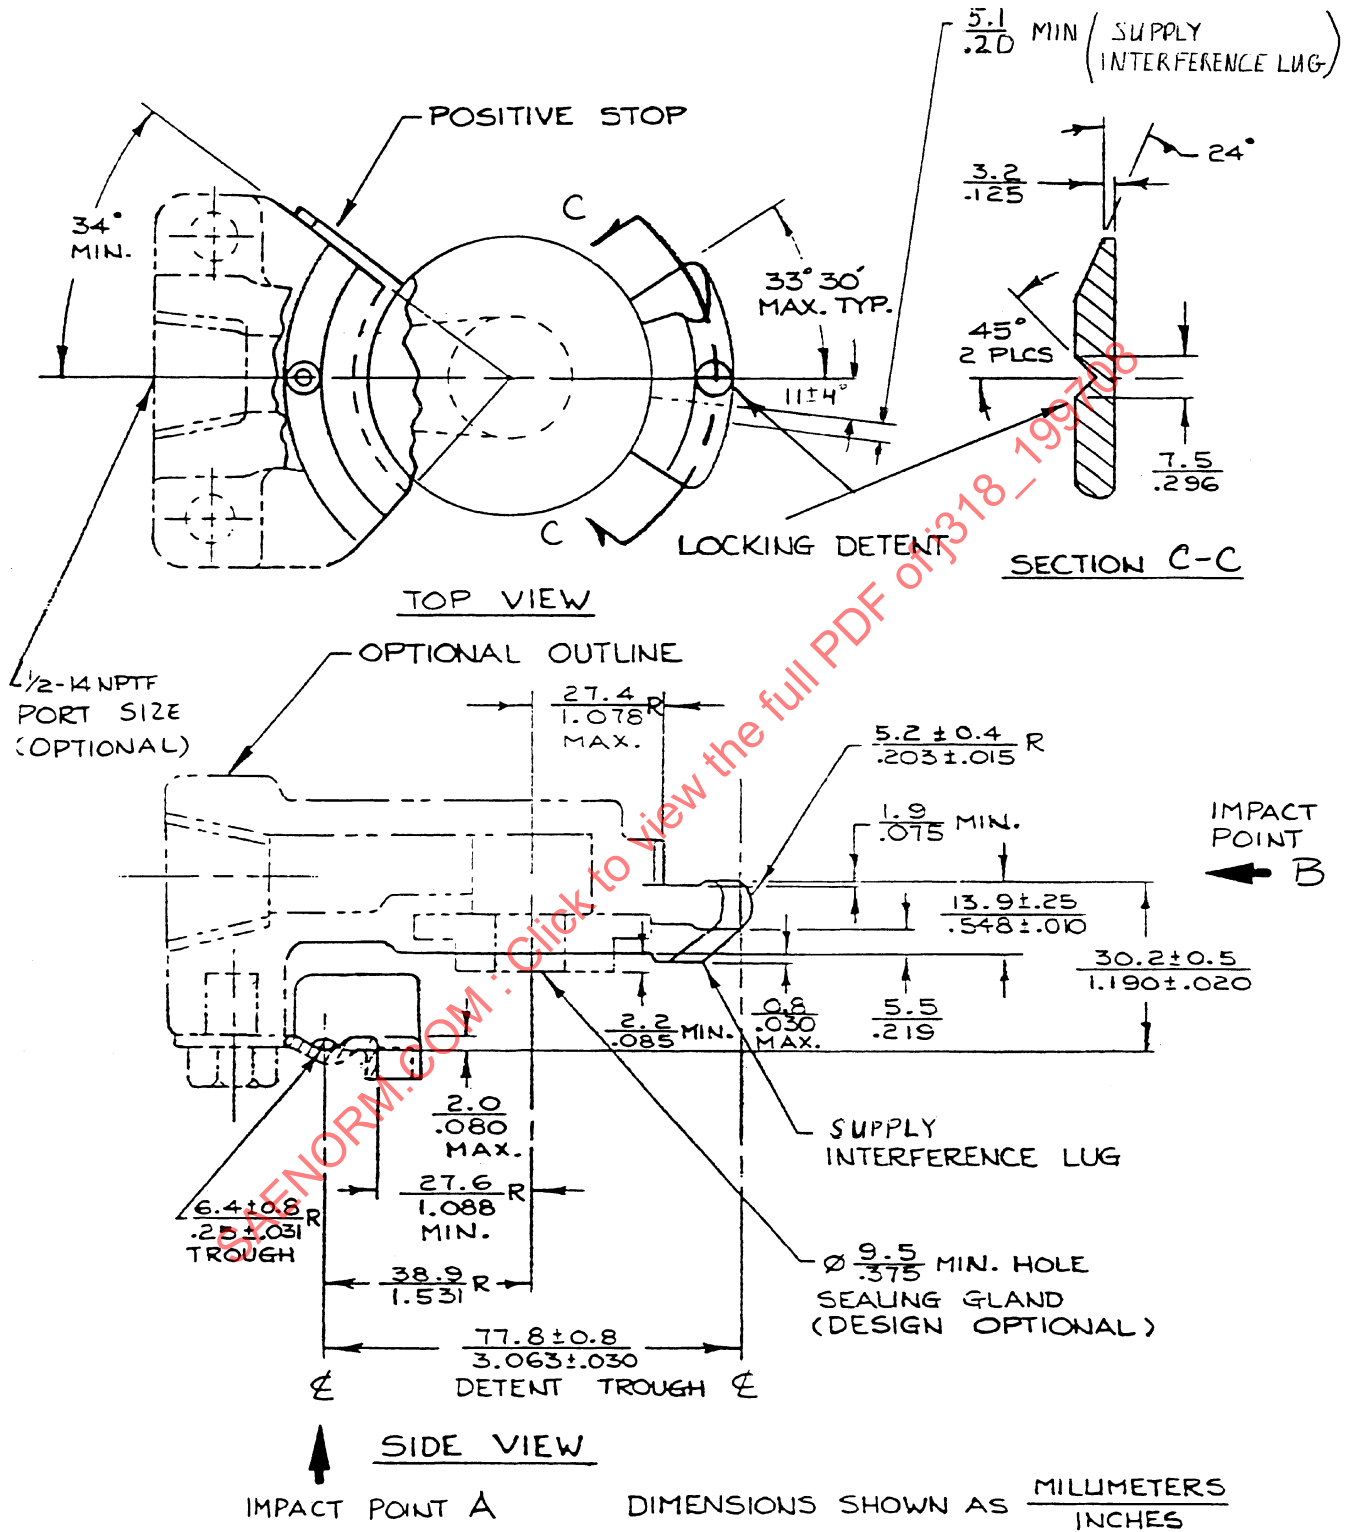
SUPPLY (EMERGENCY) AIR BRAKE COUPLER
